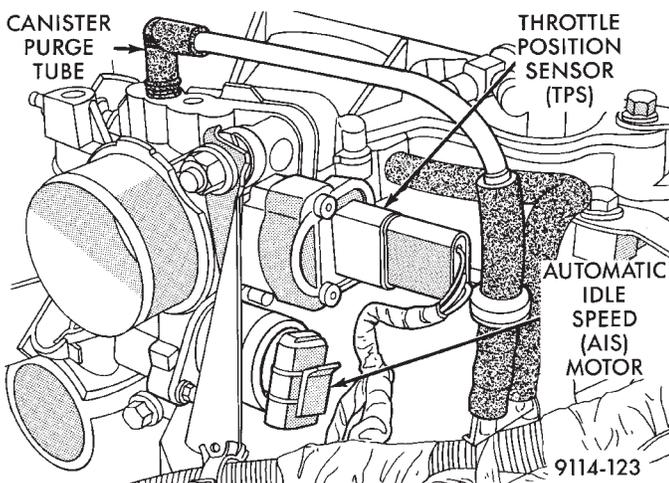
Electrical and Vacuum Connections to Throttle Body
